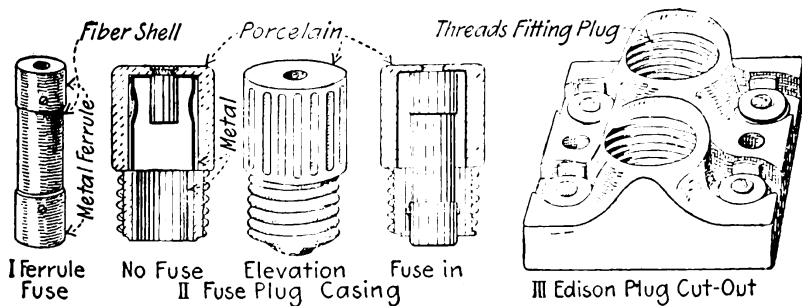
Edison plug cut-out and Edison fuse plug casing.
